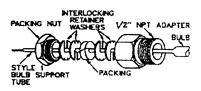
Part No. FTG13A-600R packing nut assembly. (Used with swaged bulb with support tube for direct immersion application.)
